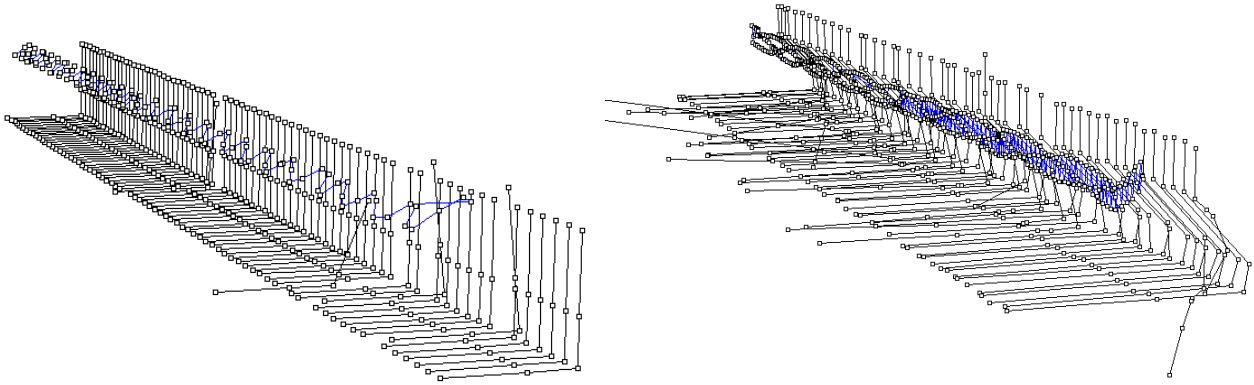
Weld face of a T-Joint seam to the left and HalfV-Joint seam to the right. The breakpoints from pre-profile sensing of weld face are merged to the same frame as the tool centre point (blue line) from the welding experiment. Noise causes that some of the measured breakpoints are out layers. For both welding experiments oscillation are used, which causes the weaving of the tool centre point.
